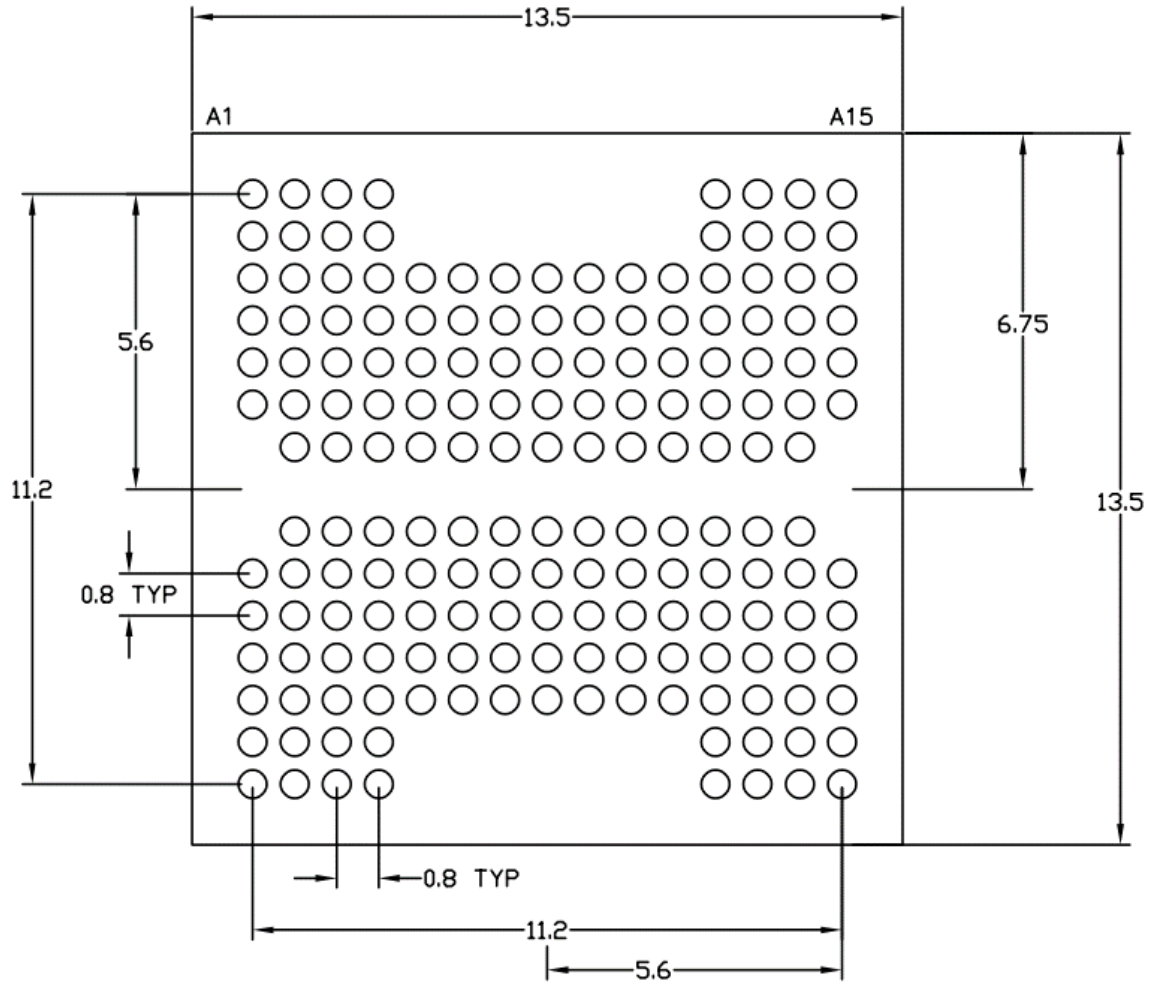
BGA-178 ball spacing requirements (top view, dimensions in millimeters)
